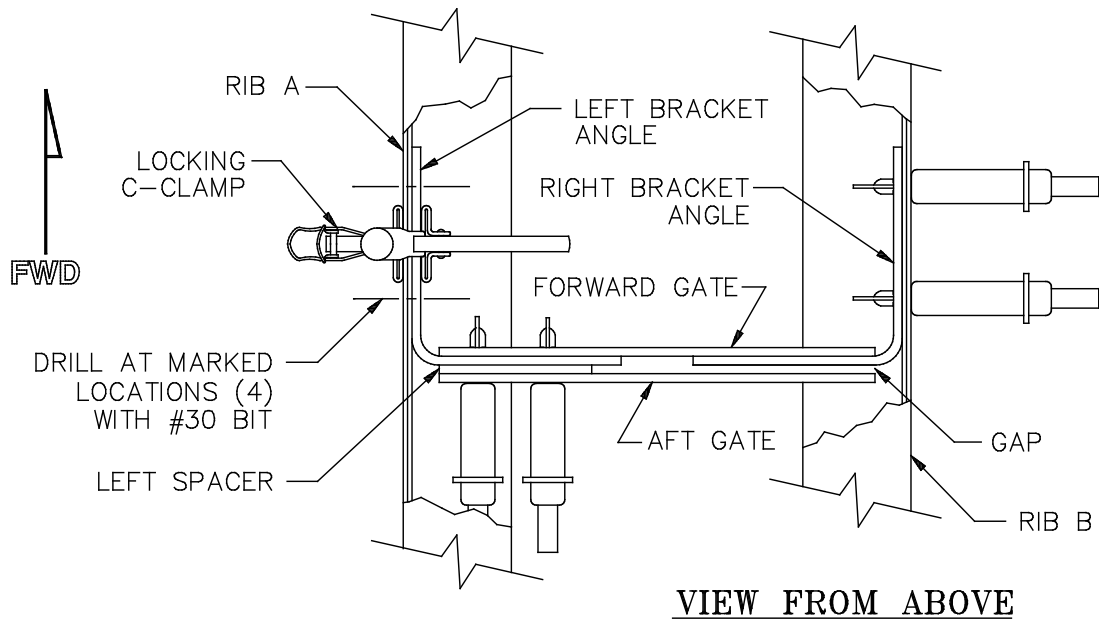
Positioning and Drilling the Left Trim Cable Bracket Half
